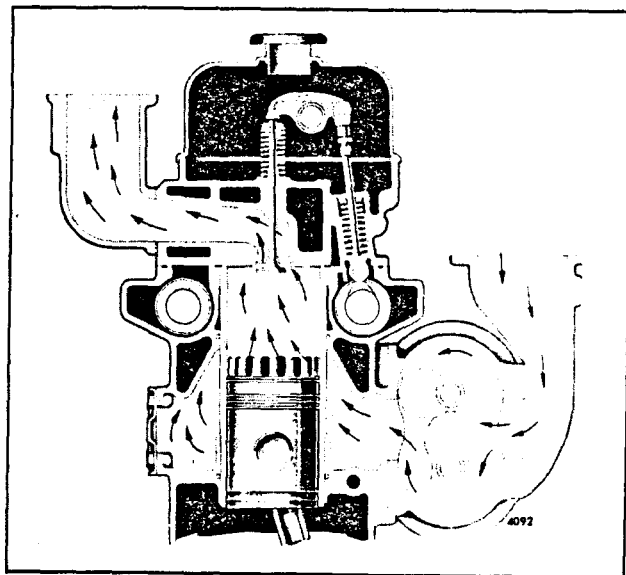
Air Intake System Through Blower and Engine (In-line Engine)
